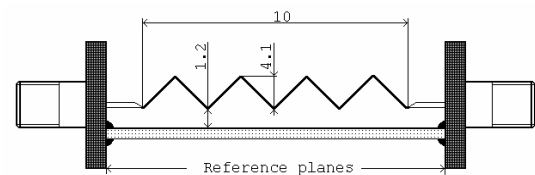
Test fixture for the measurement of the solenoids with 4-turn solenoid inserted. Dimensions in mm.
